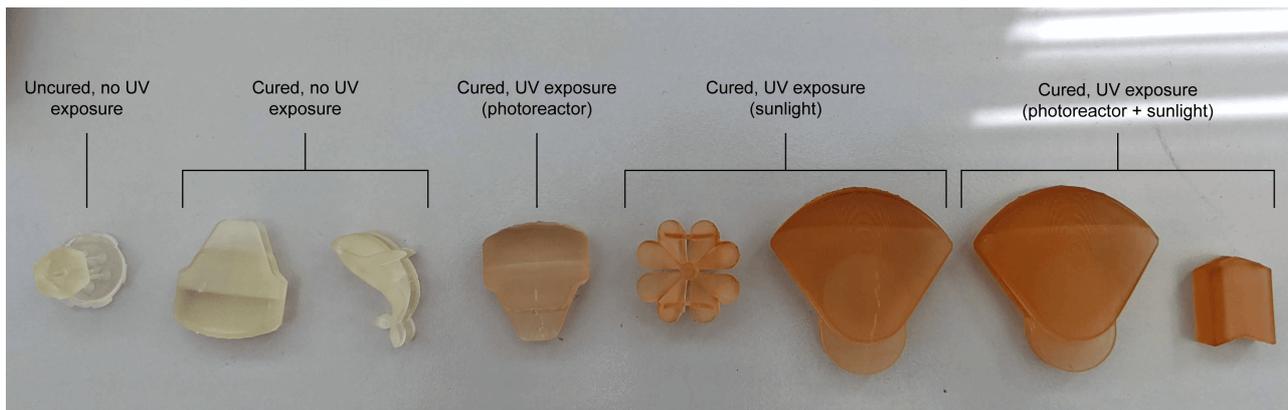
Test prints using NOVA3D clear resin for 405nm SLA 3D printers, showing prints cured and uncured post print, and unexposed and exposed to UV light in a photoreactor and/or sunlight.
